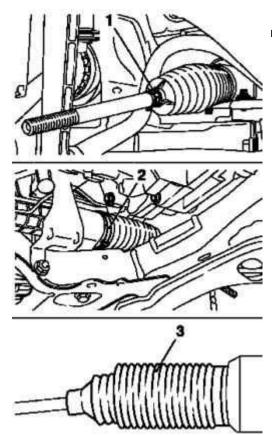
Removing the shroud tie rod: 1, 2 - Fixing brackets, 3 - cover
